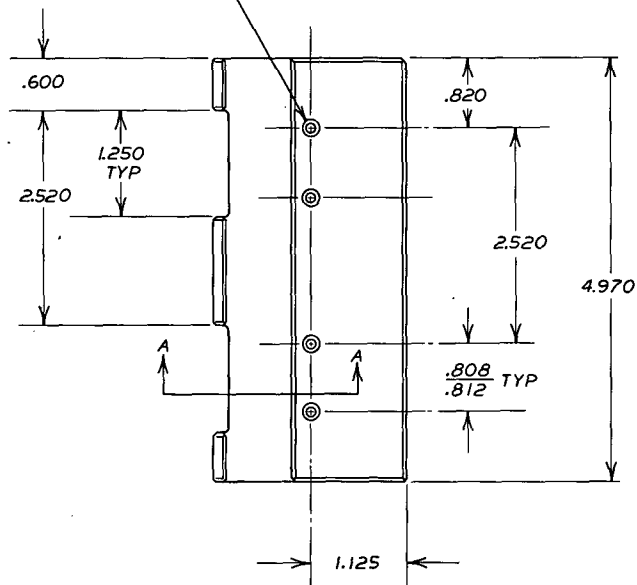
is the rear view of a strut pair and cover plate pair assembled. The slot width formed by the space between upper and lower covers should be inspected at the connector end of the box due to the fact that this slot tapers somewhat toward the overlay clip which is retained by the covers.
